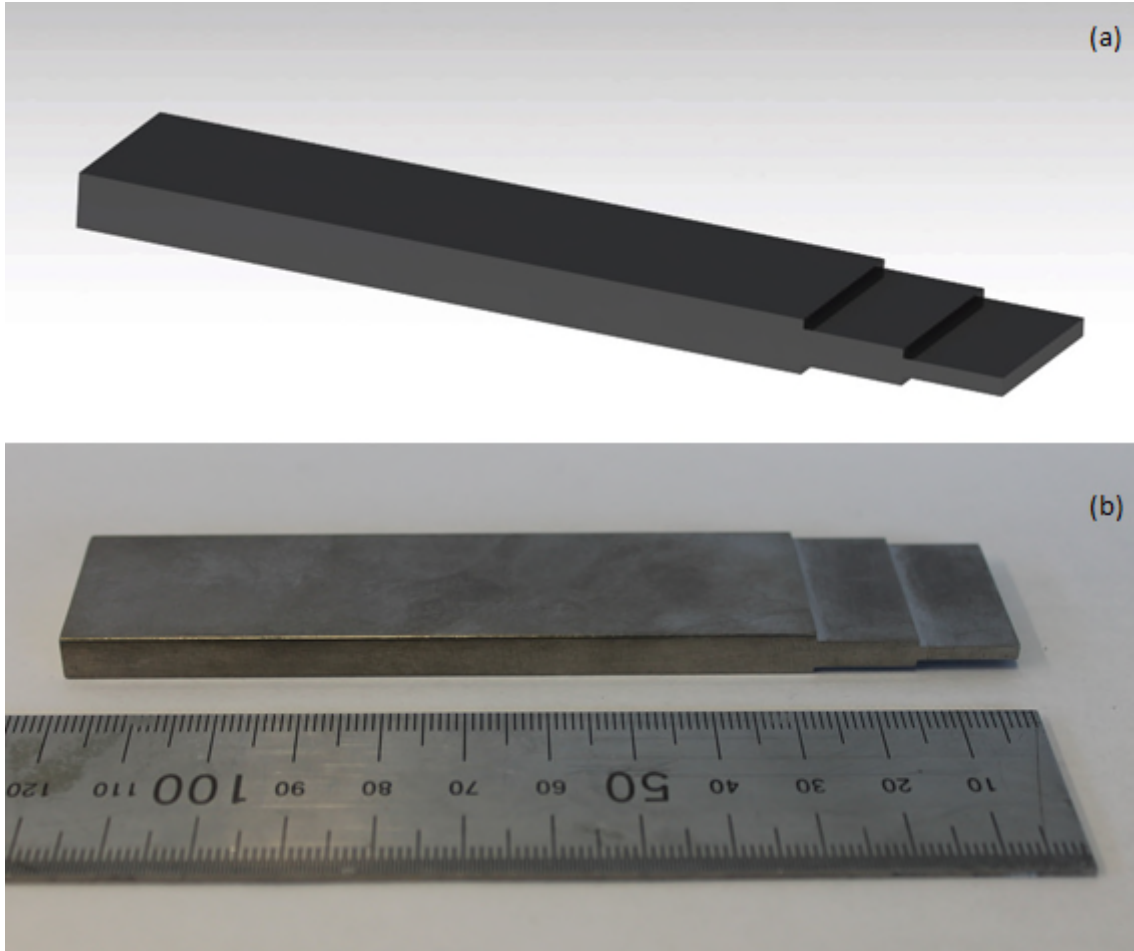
Control Double-stepped joint: (a) 3D CAD image, (b) micro-machined joint
